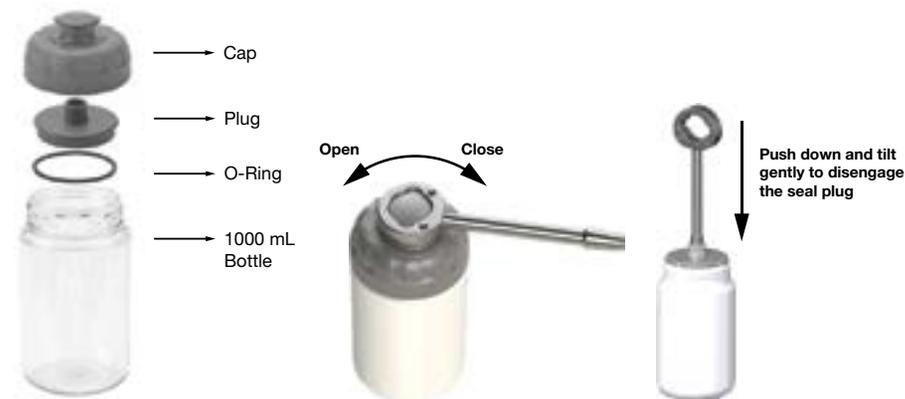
Left: assembly instruction. Center & Right: Use the tool to close and open the cap of the bottle and take of the plug
